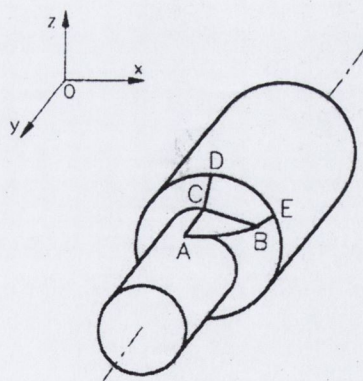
Contact surface on a workpiece for a CWR process [42].
